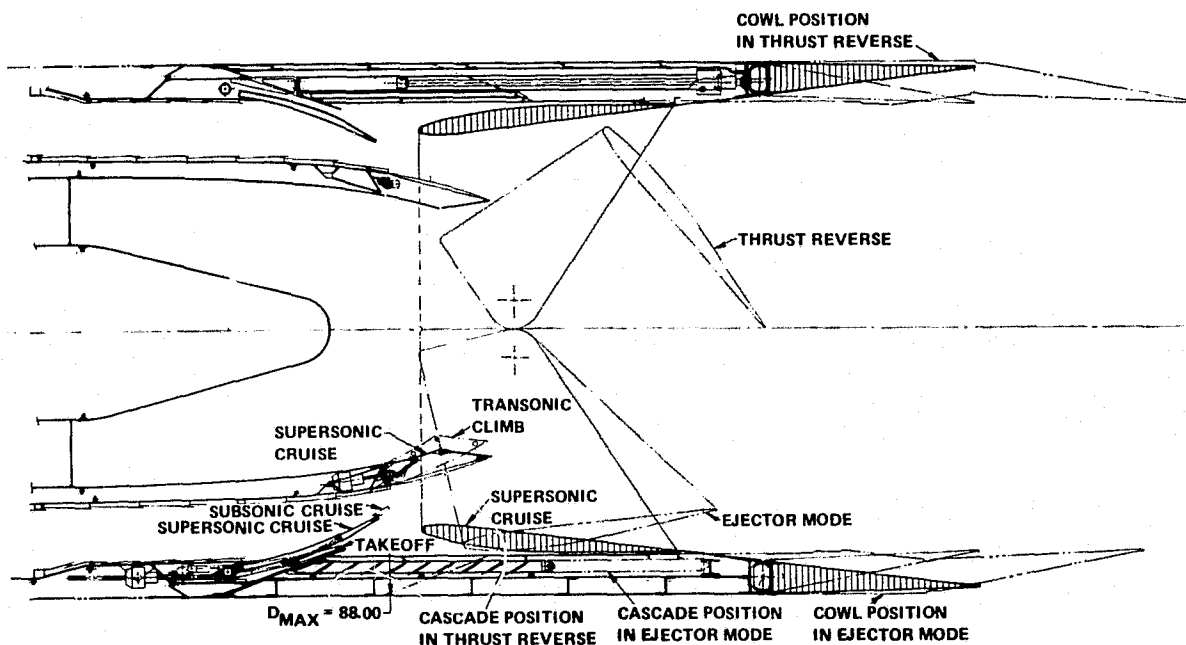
Nozzle/Reverser Configuration 3 Preliminary Design Layout
